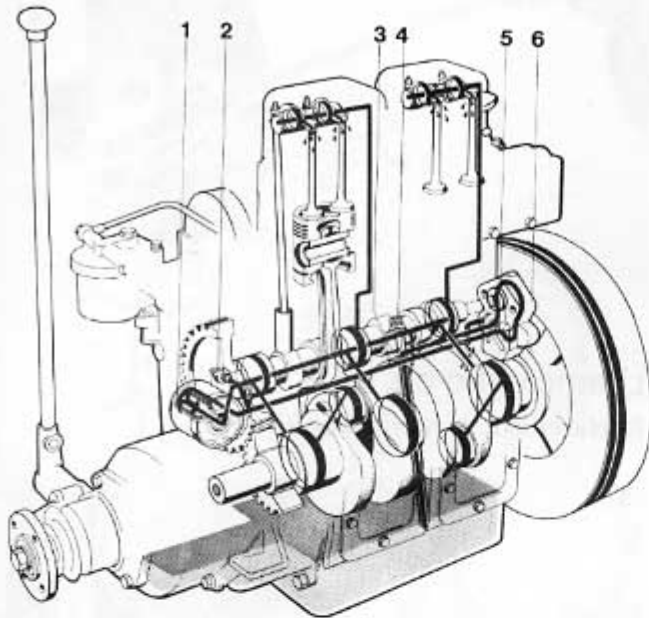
Lubricating system, MD2B with reverse gear type RB
